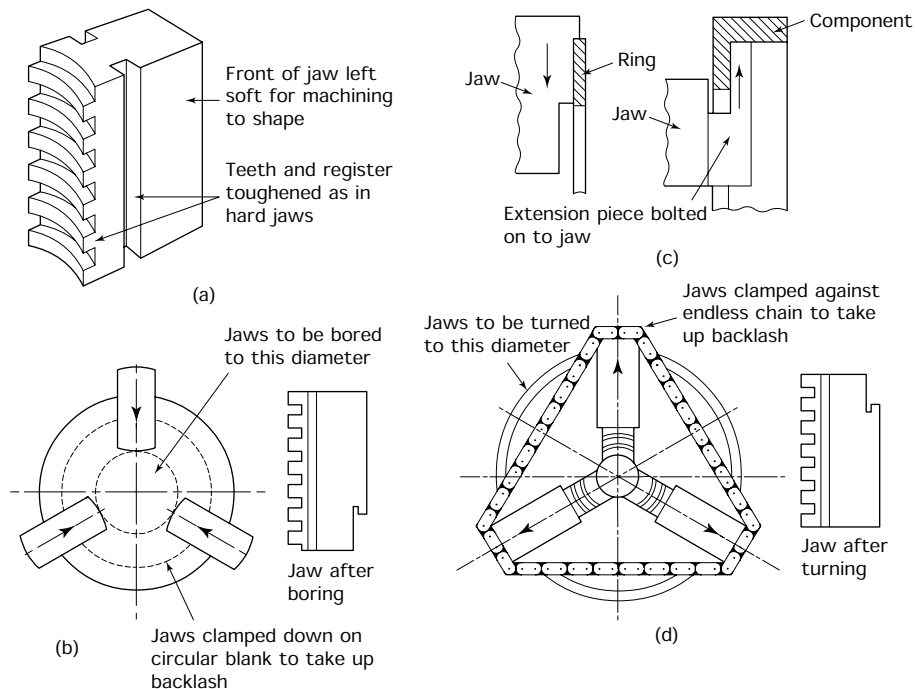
Use of soft jaws: (a) soft jaw; (b) boring soft jaws; (c) applications – (left) jaw bored to give maximum support to a thin ring whilst it is being bored and faced, (right) jaw fitted with extension piece to avoid holding onto and damaging the flange; (d) turning soft jaws
